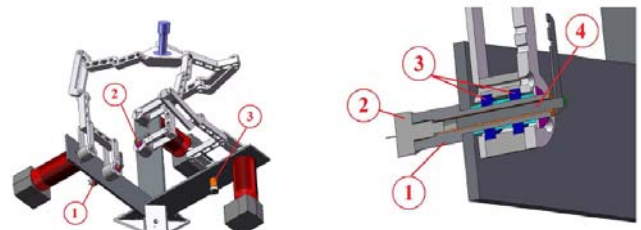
Sensor locations and sensor housing designs: (a) Location of the sensors, (b) The design of the sensor housings
